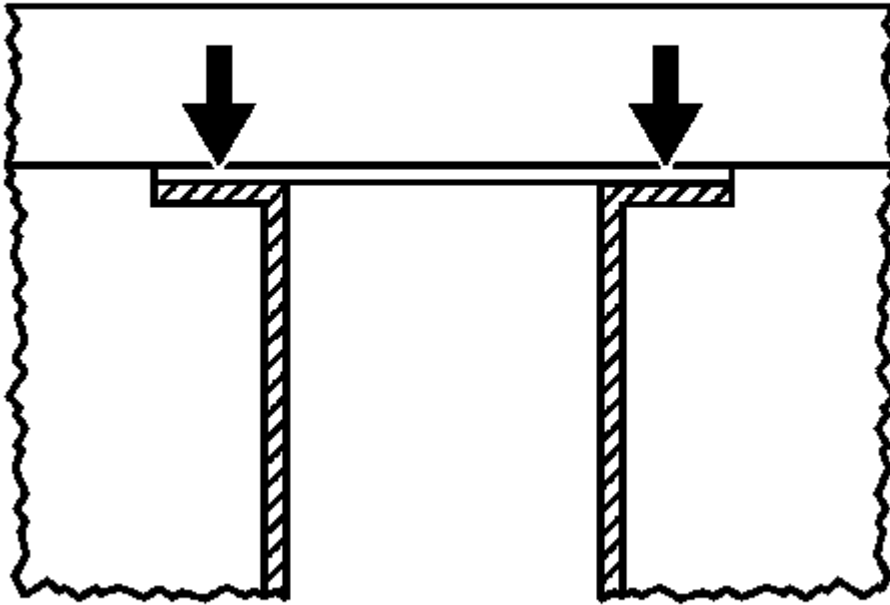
View Of Improperly Cut Cylinder Bore Sleeve
